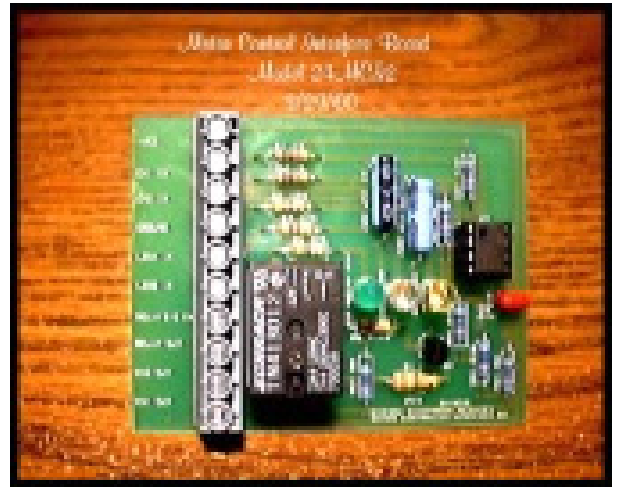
Motor Controller Interface Board DES 24VMCI2.
